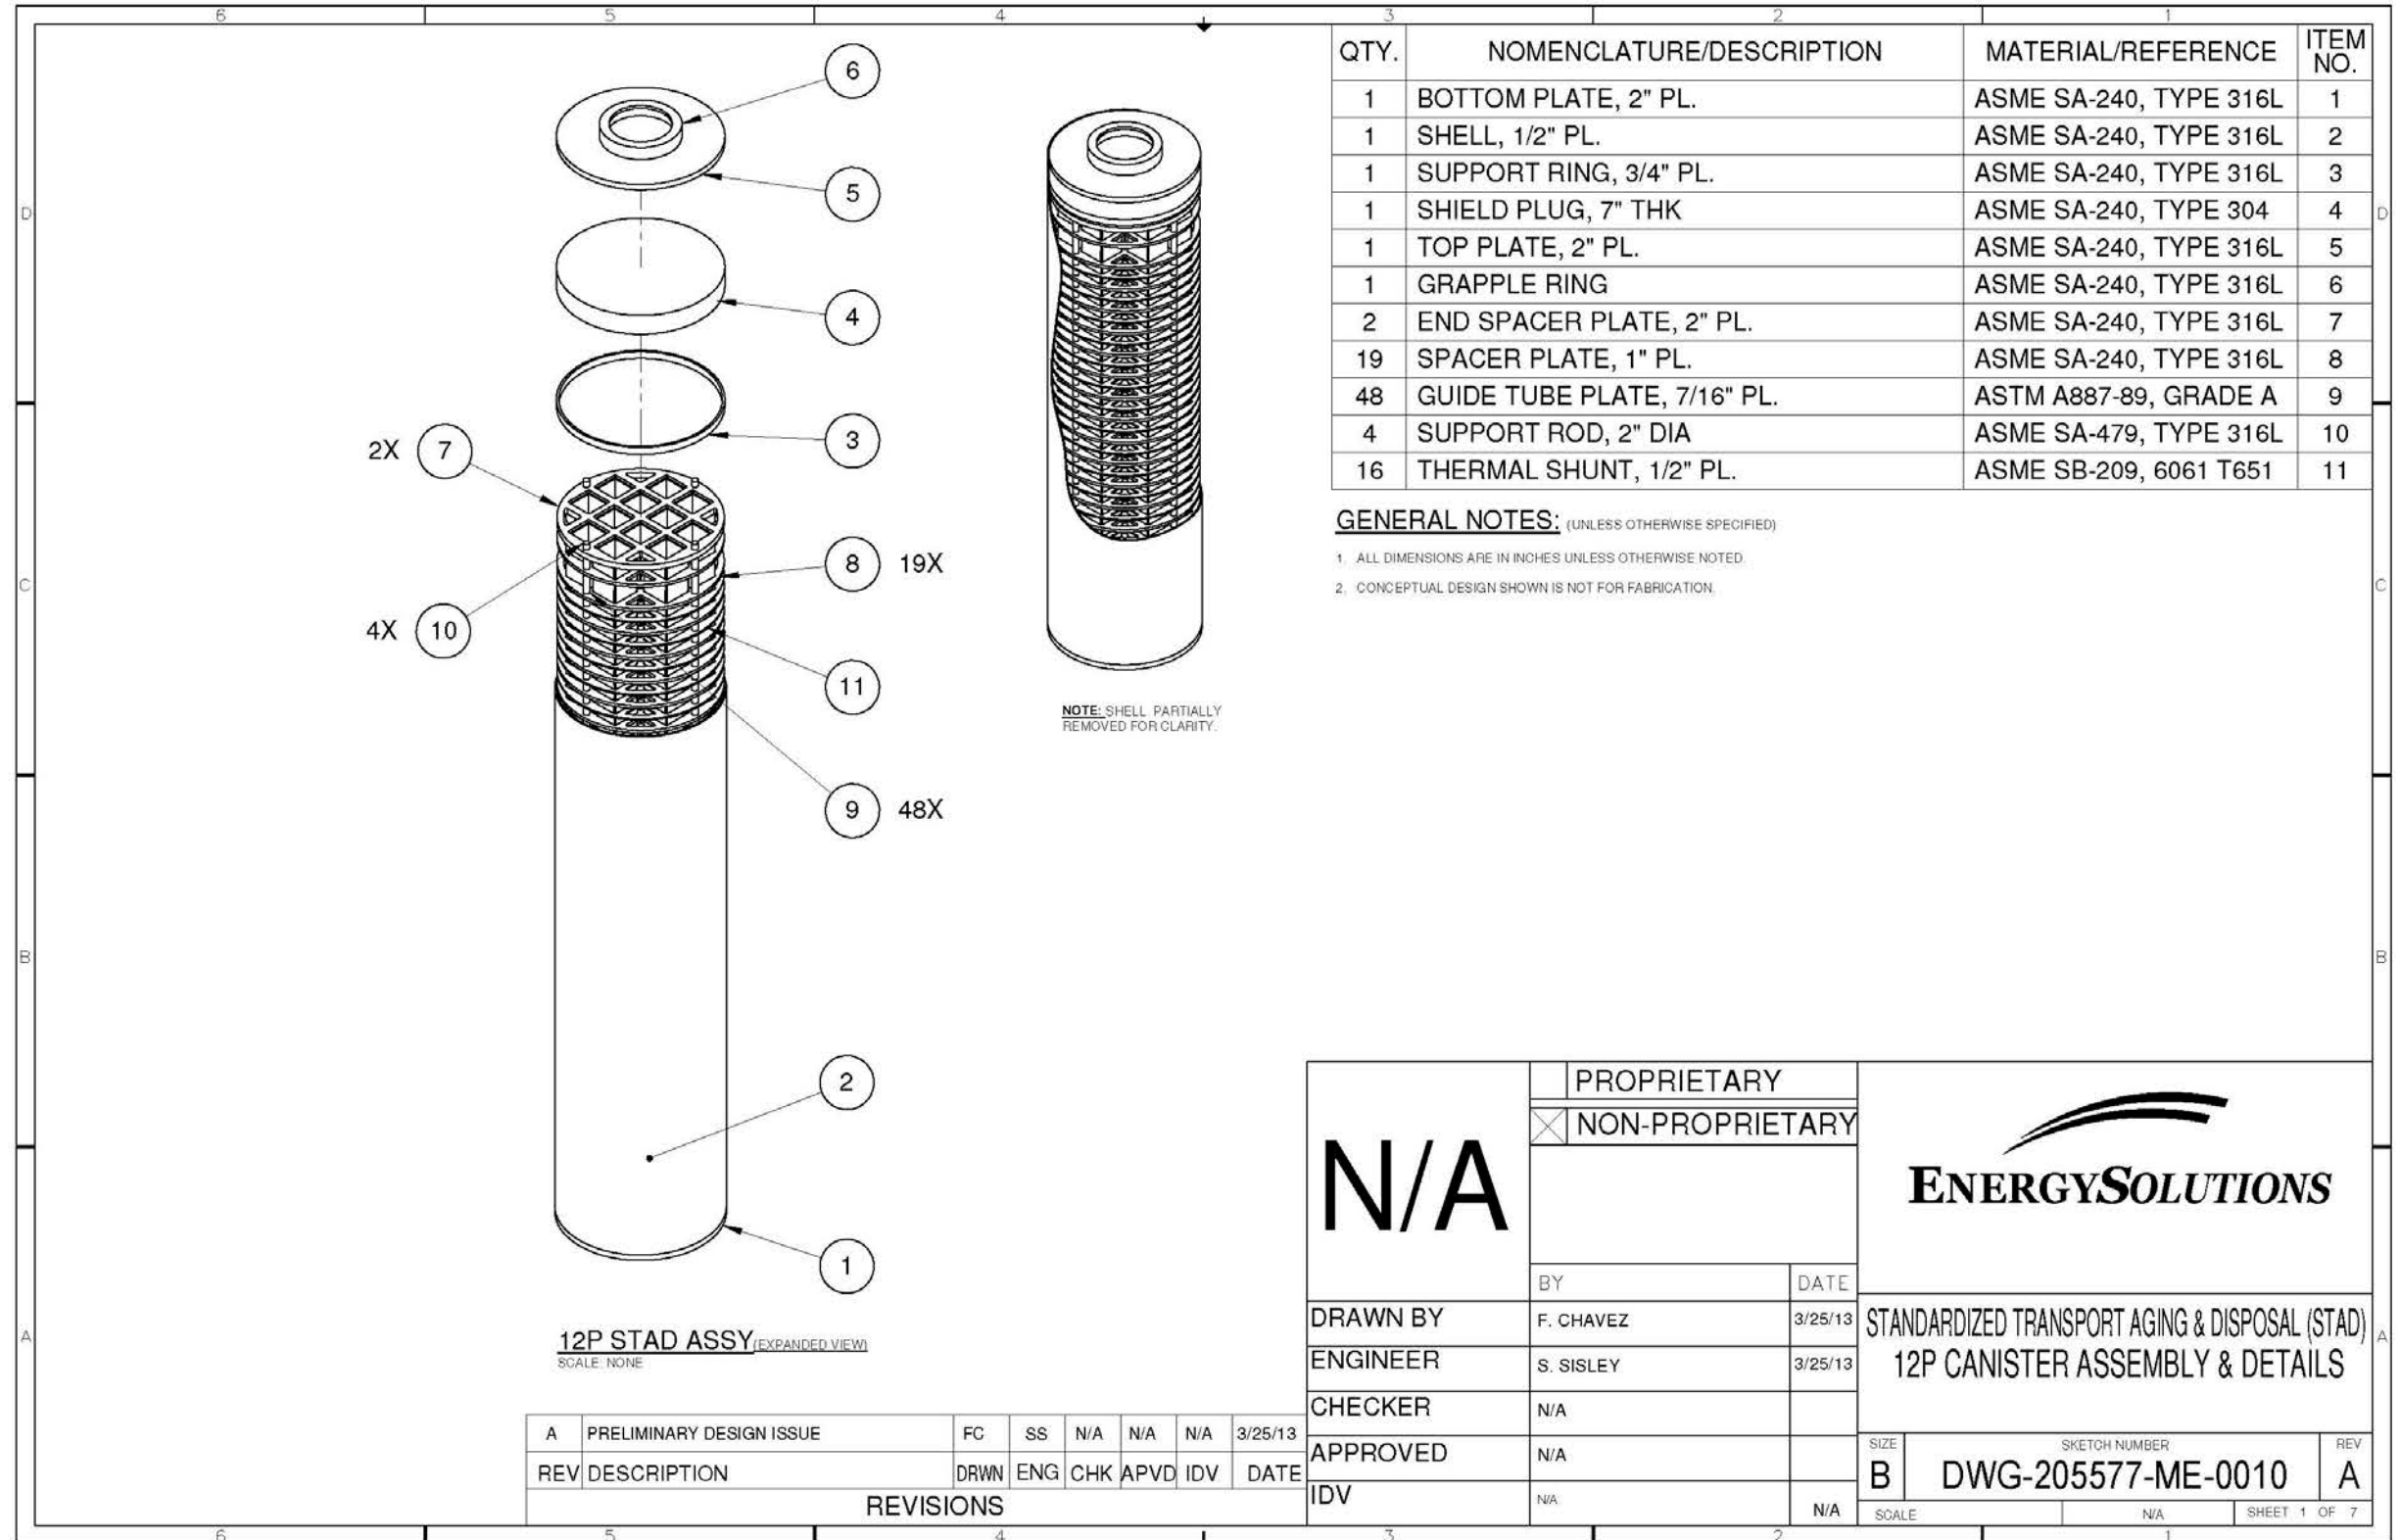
Standardized Transport, Aging and Disposal Canister - 12 PWR Assemblies - Assembly & Details – Sheet 2 of 7
